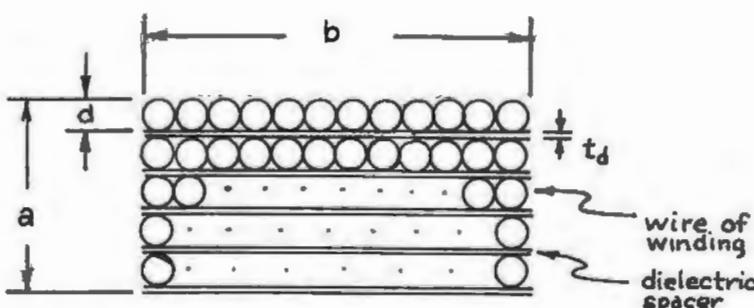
Cross-section of a winding showing dimensioning.
